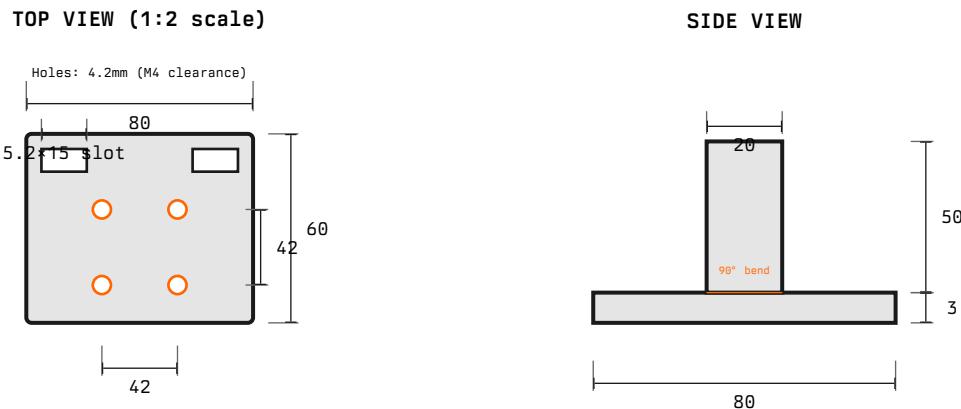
Motor bracket dimensions. Material: 3mm 6061-T6 aluminum.
